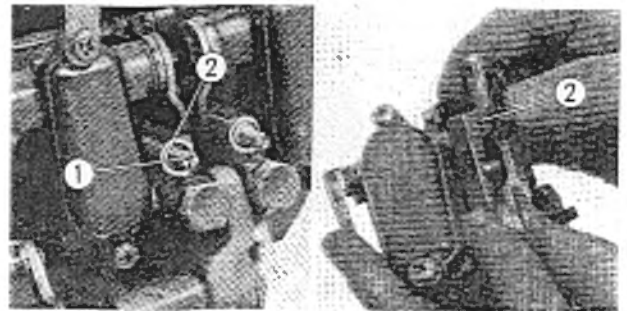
① Adjusting screw ② Adjuster holder
